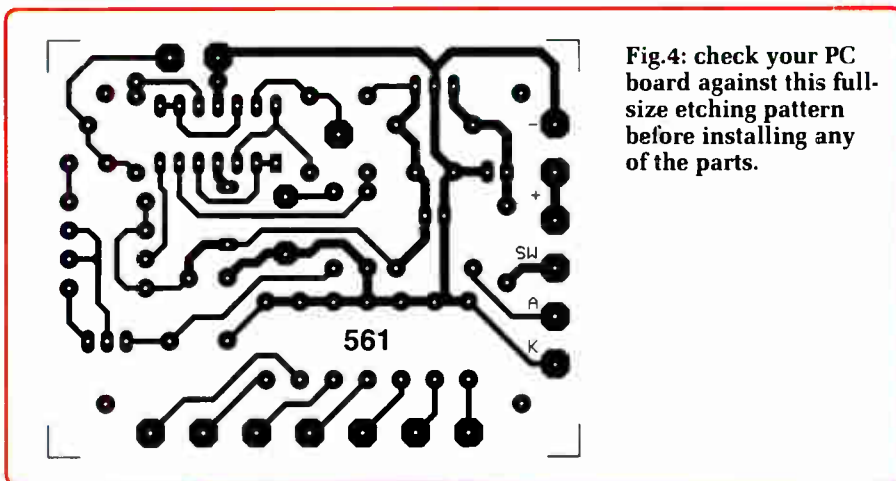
check your PC board against this full-size etching pattern before installing any of the parts.
